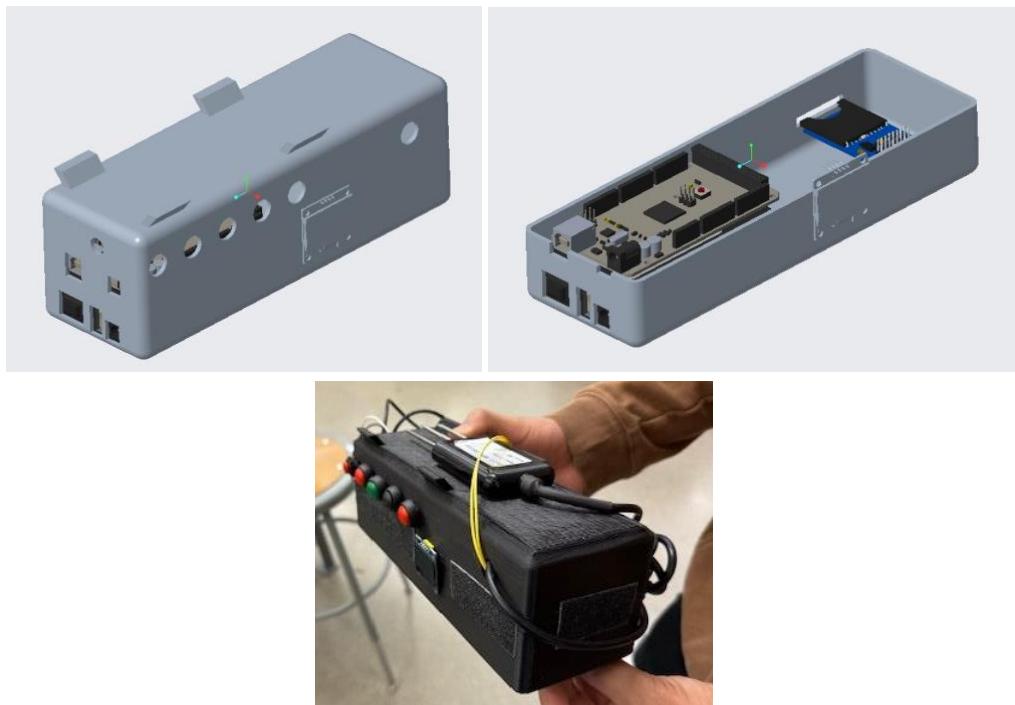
CAD vs. Manufactured Sensor Probe Casing
